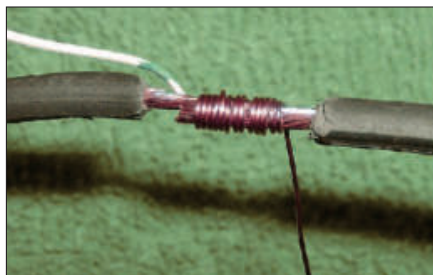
Wrap both exposed wires with #24 AWG solid copper, then solder. [Frank Ingle, KG4CQK, photo]
